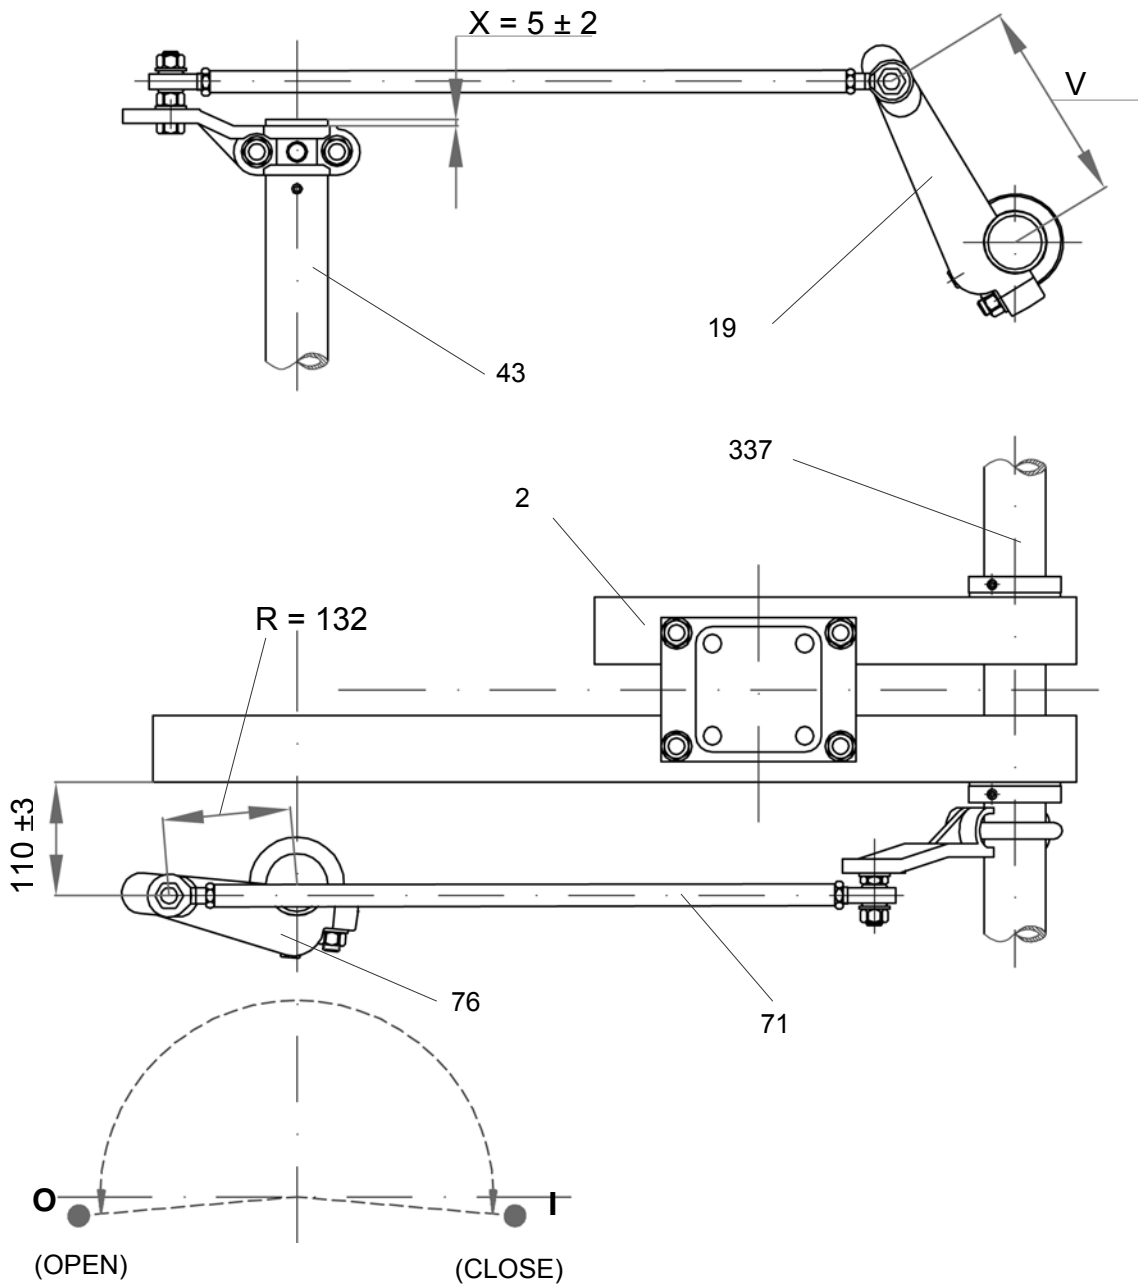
Mounting of operating mechanism for earthing switch, separate mounting –dimension m3
